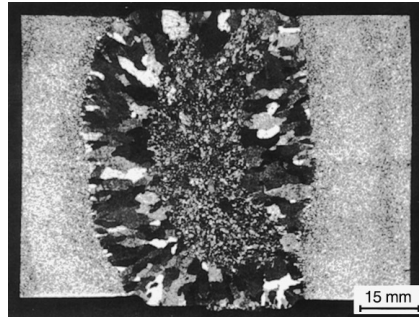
Transverse cross section of electroslag weld in 70-mm-thick steel. Reprinted from Eichhorn et al. (13). Courtesy of American Welding Society.
